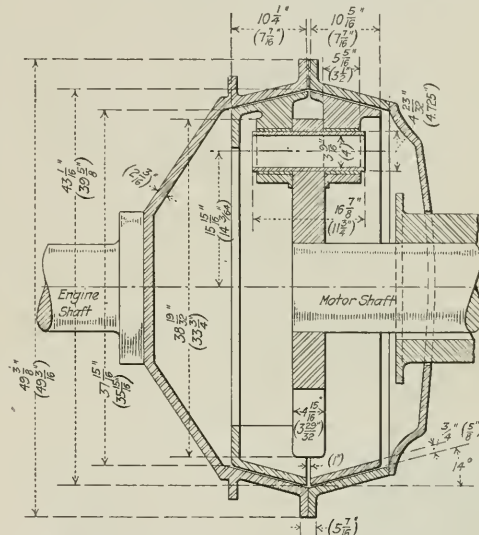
PRINCIPAL DIMENSIONS OF CLUTCHES
